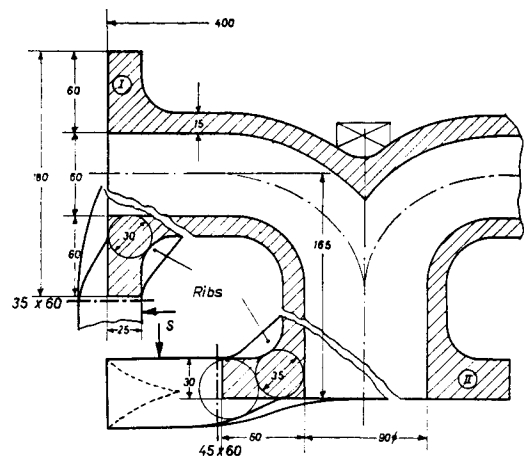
Neck of a distributor casting. Alternative 4: feeding through open feeder heads.
